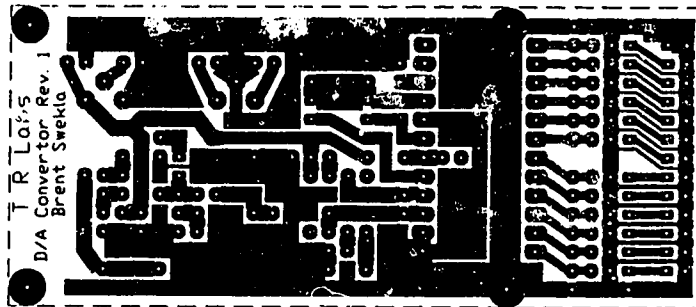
(b) *D/A converter board: Printed circuit board mask - bottom side
